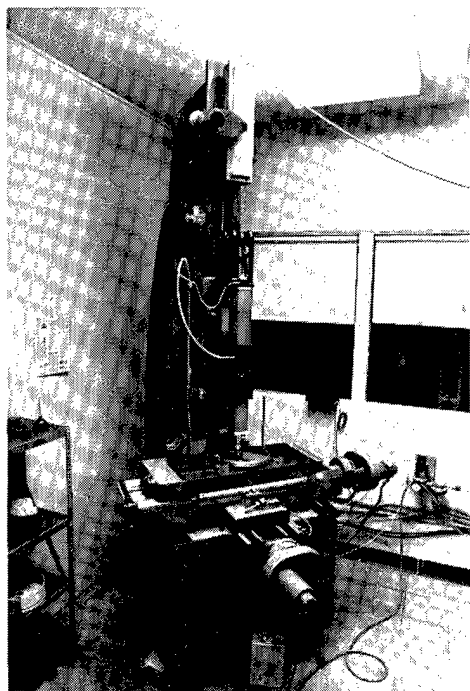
The High Precision Measuring Machine. The basic machine is a #3 Moore Jig Borer.
